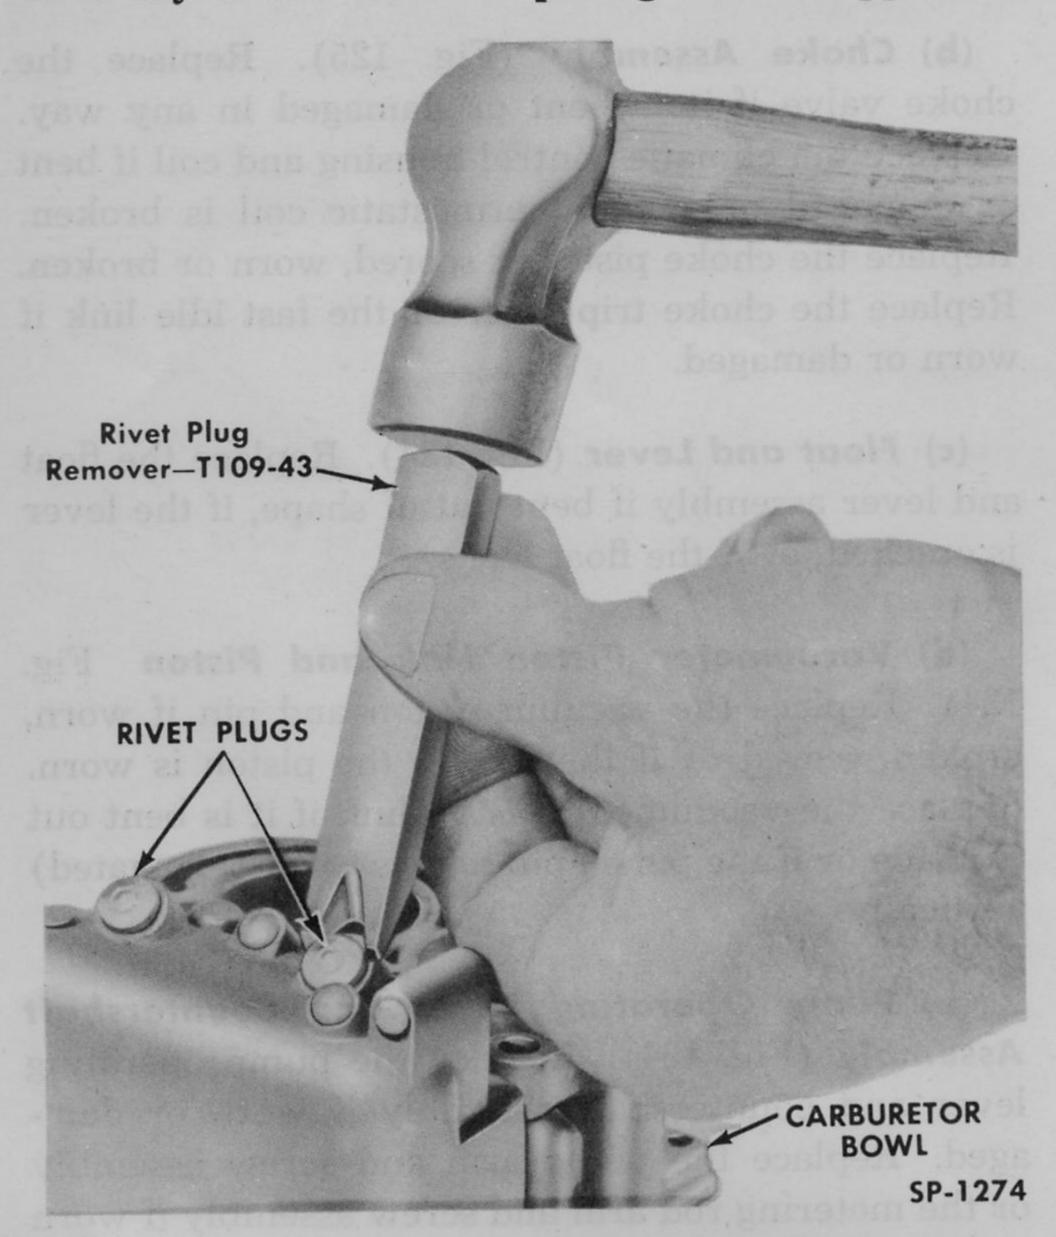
Removing Rivet Plugs (WGD-7815 Shown)
